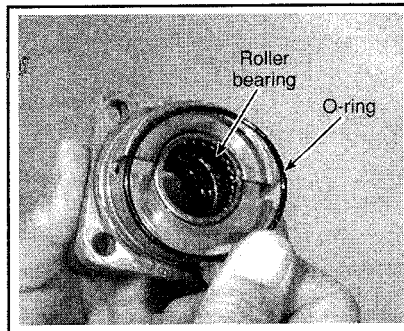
Remove the O-ring and inspect the bearings
